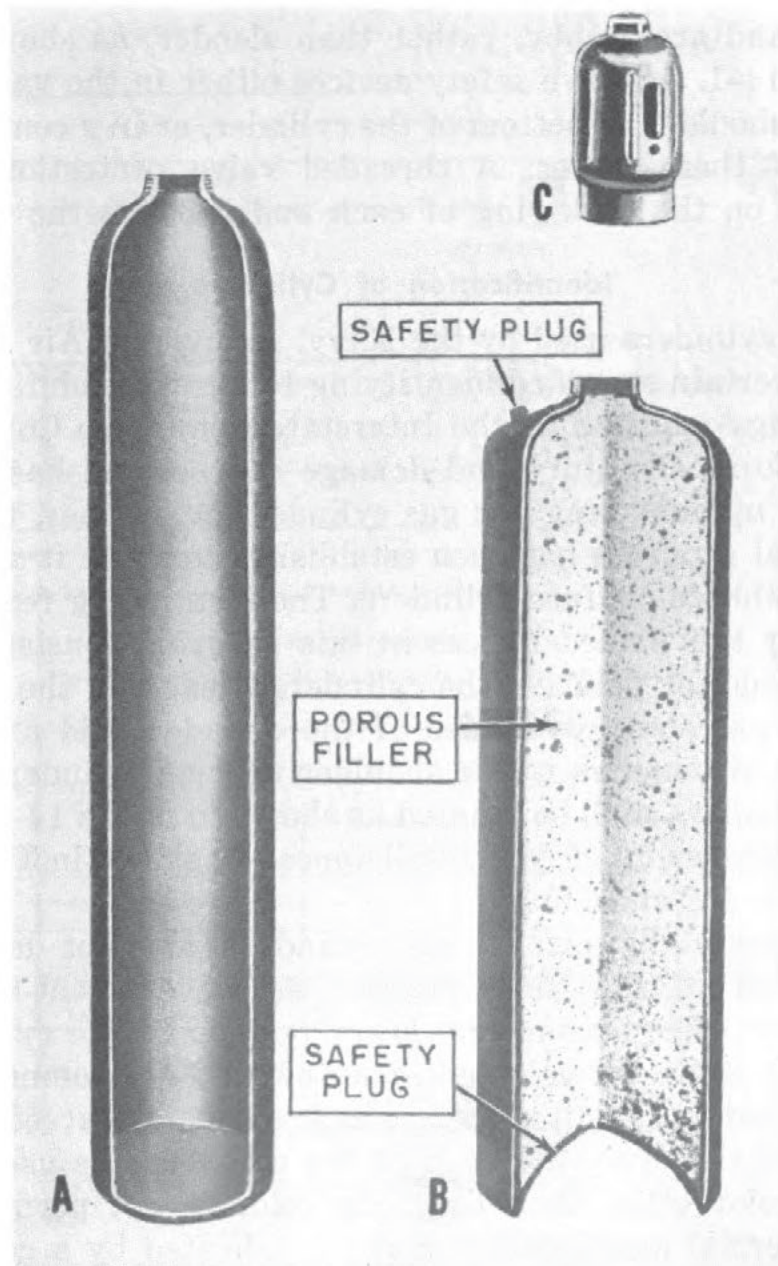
Cutaway view of compressed gas cylinder: (A) oxygen cylinder, (B) acetylene cylinder, (C) valve protection cap.
